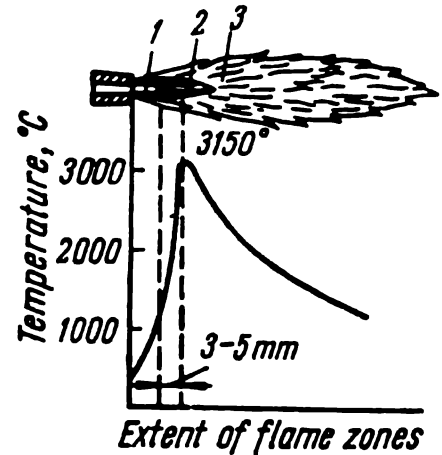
Structure of the oxy-acetylene welding flame
